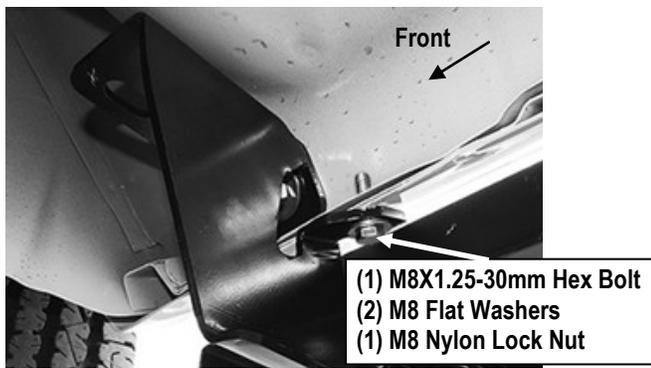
Passenger Side Rear Mounting Bracket Installation
